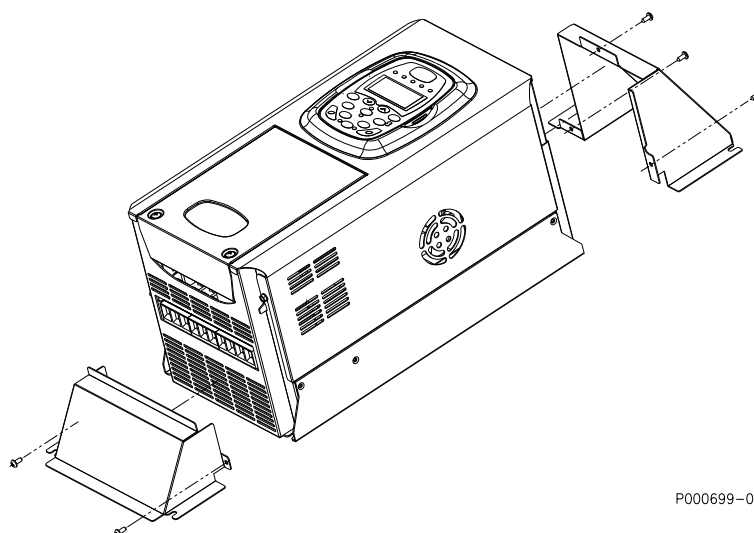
Fittings for through-panel assembly for SINUS PENTA S12
